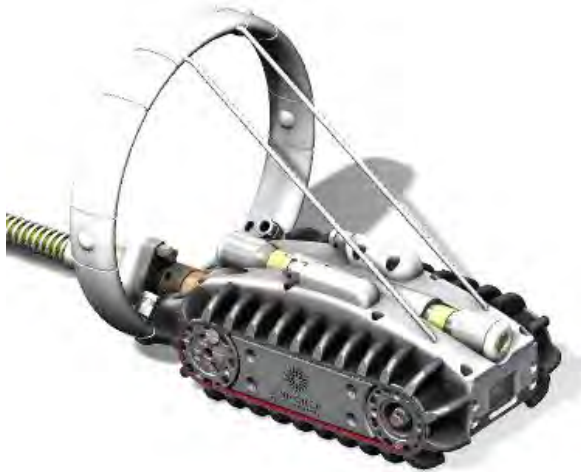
Design image of robot crawler, forward and rear facing cameras mounted on the body
